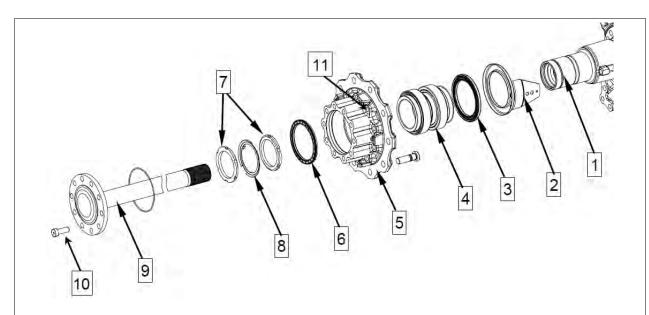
ZF A-132 DRIVE AXLE HUB ASSEMBLY
